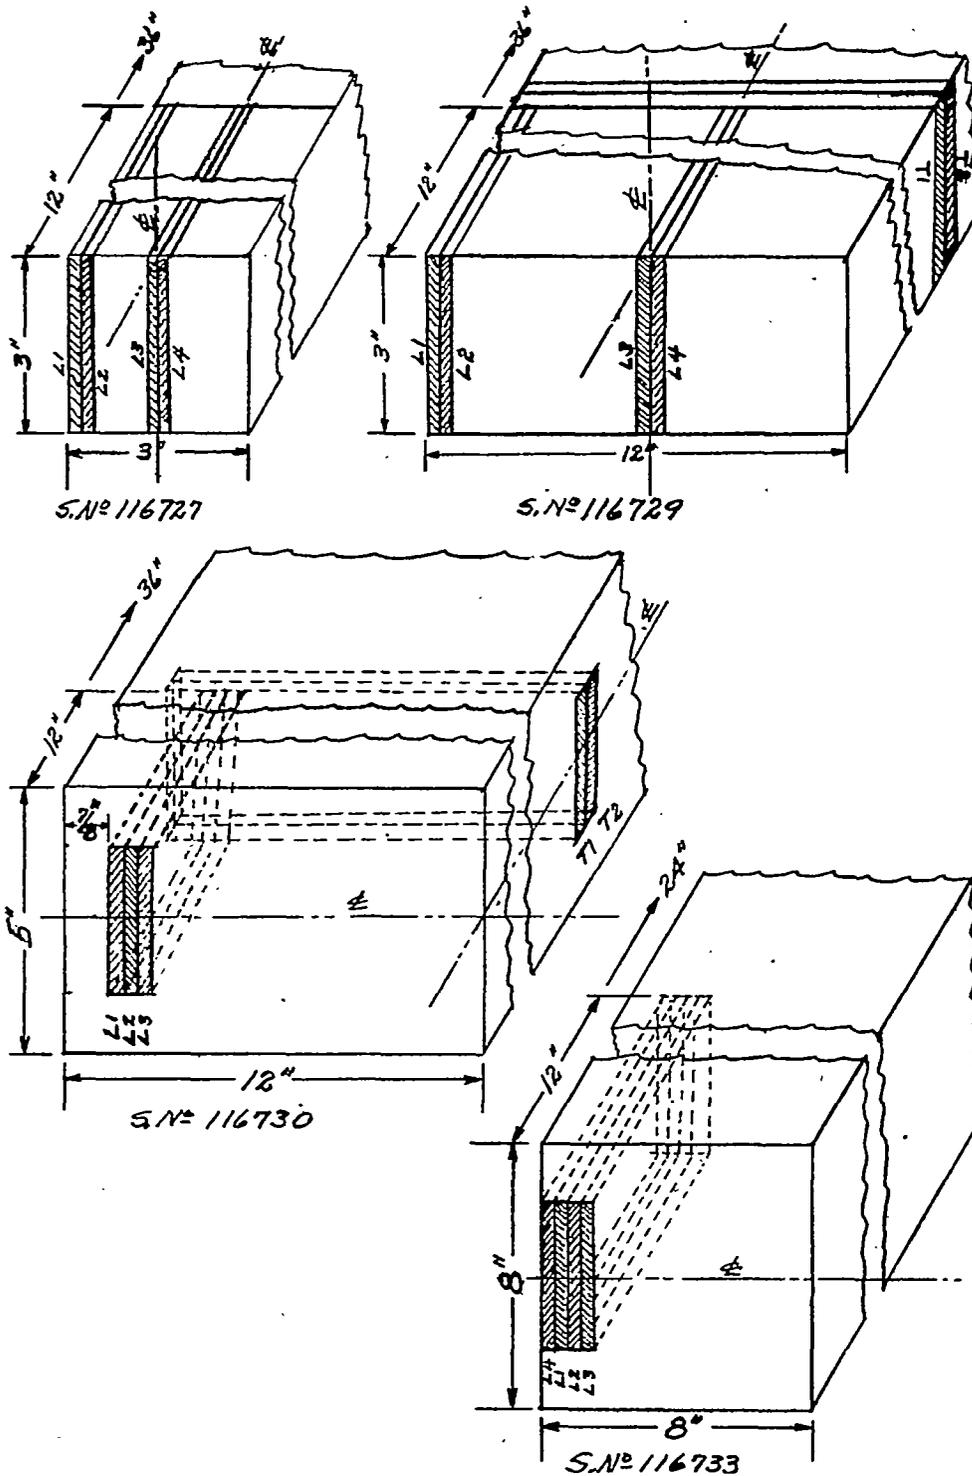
Locations in 75S-T6 aluminum-alloy hand forgings from which bearing specimens were obtained. Specimen size, 3/16 inch by 2 inches by 12 inches.
